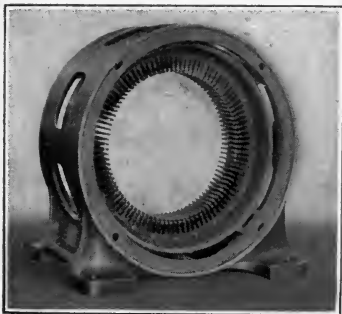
Stator Core and Frame. Crocker-Wheeler Co.
